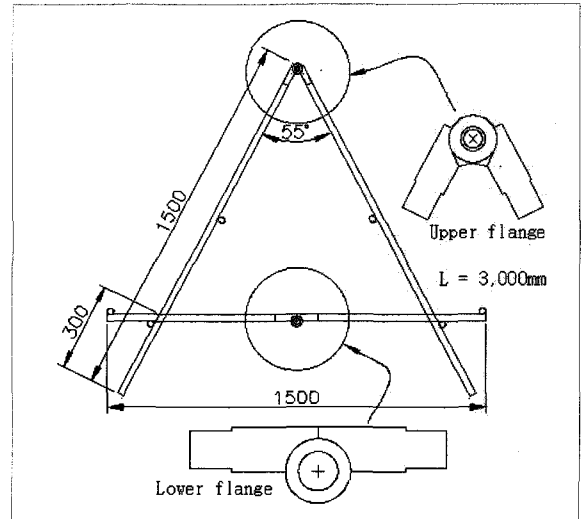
A front view of drying stand with upper and lower flanges. (unit:mm)
